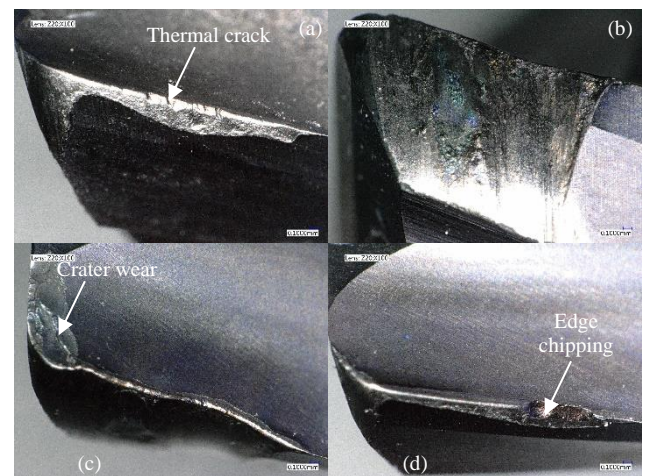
Post-machining wear observations due to preheating at (a) 400°C; (b) 500°C (flank side); (c) 500°C (rake side); (d) 600°C
